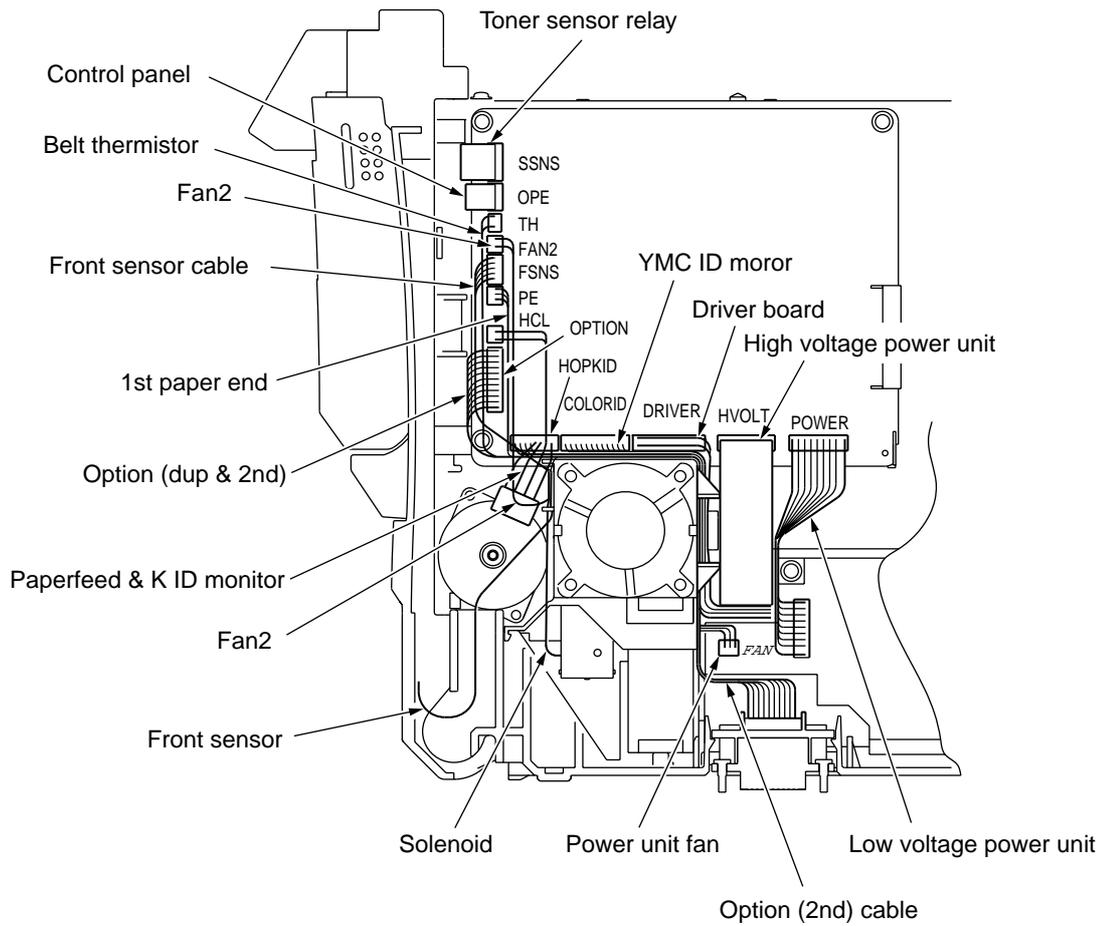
Print Engine Controller Board Cable Route
